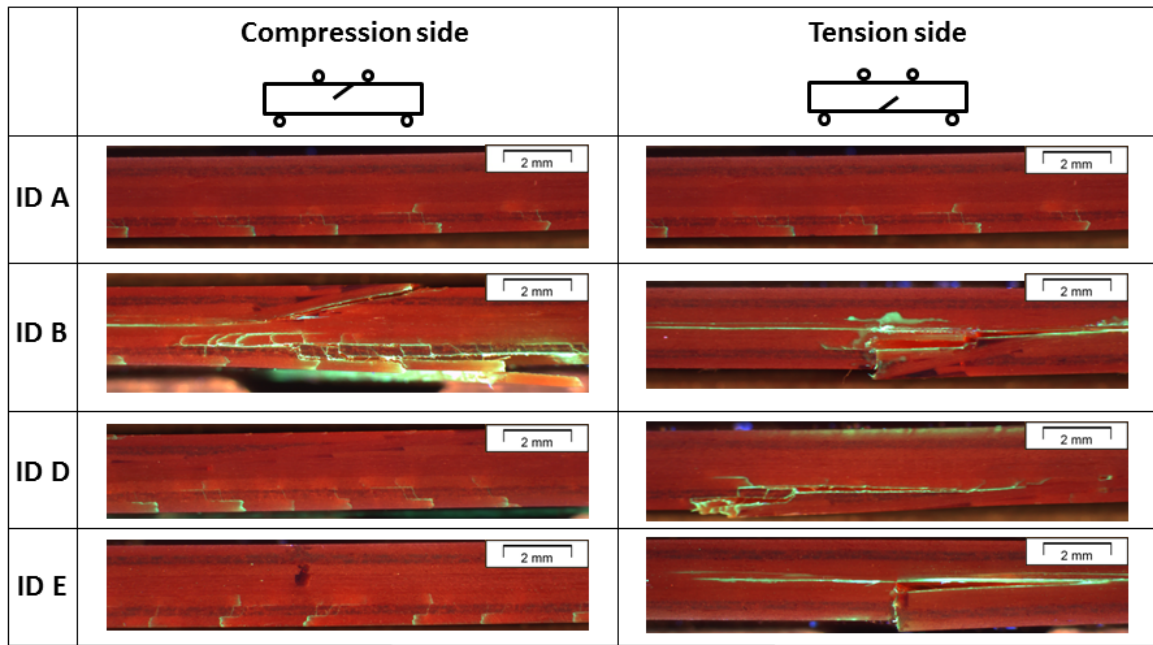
Fractography of flexural samples. Damage highlighted using UV dye penetrant.
